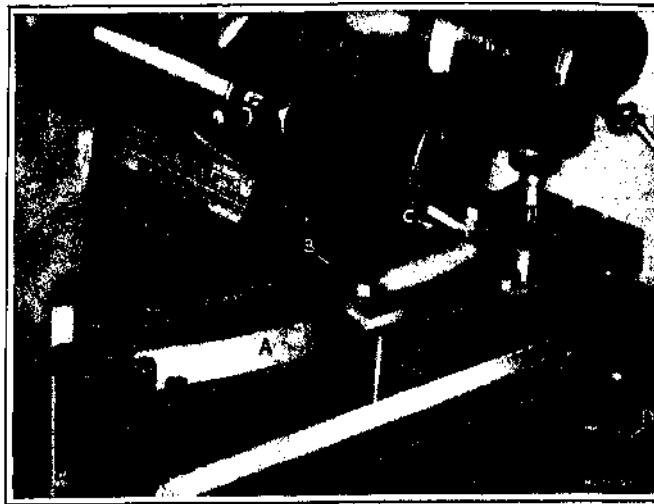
Fixture for Rough-milling a Circular Slot in Sight-bar
